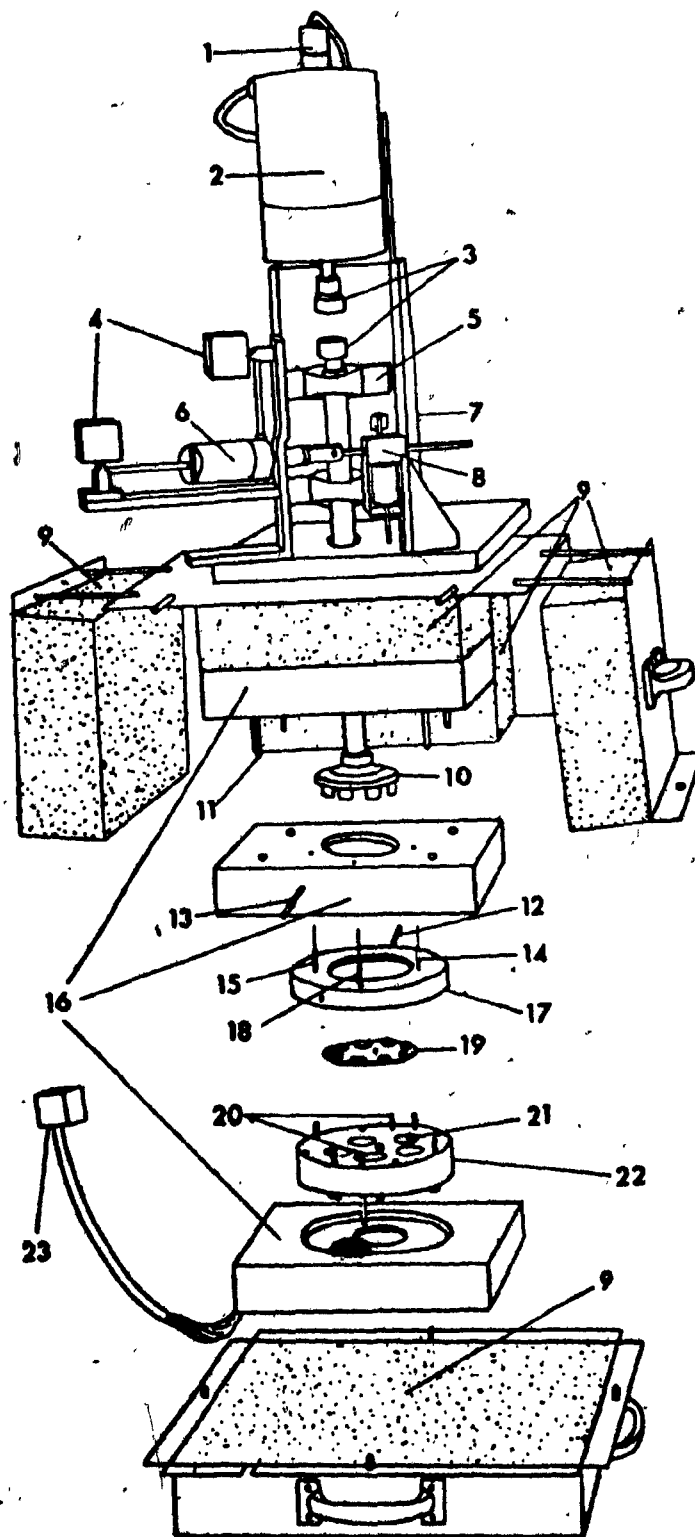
Exploded pictorial view of the CSVCR assembly
